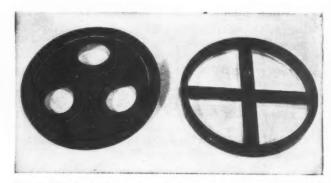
The old flywheel was replaced by welded design (right) which weighs 23% less, but is just as efficient.
